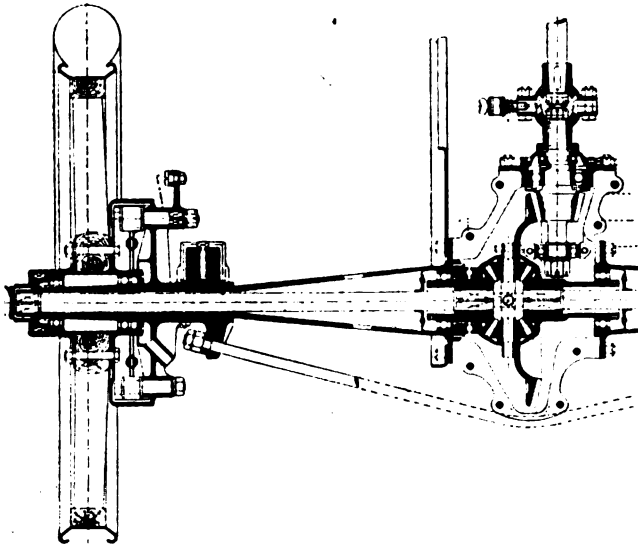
Sectional Plan of Half of Back Axle of F.N. Car.
